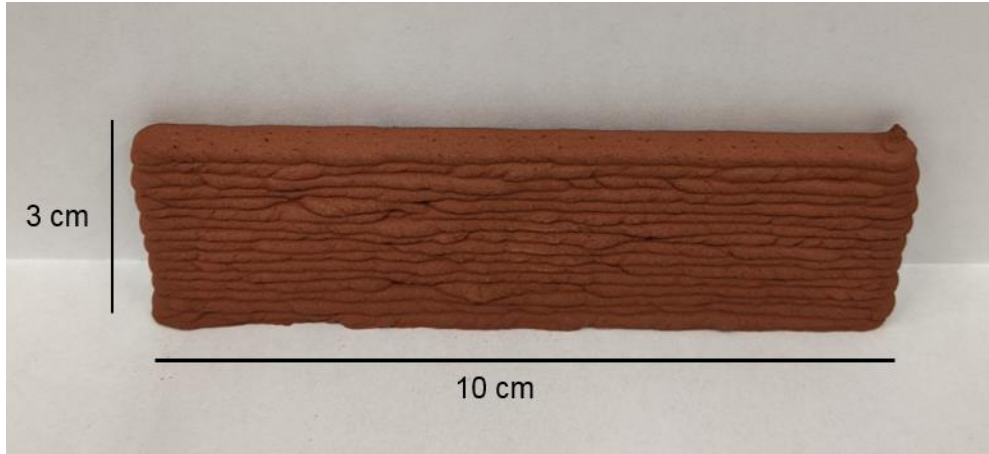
Printed thermite wall, with dimensions 10x0.5x3 cm
